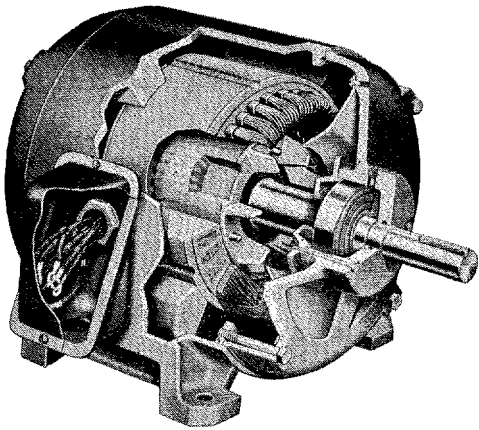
Sectional view of typical drip-proof, general-purpose, squirrel-cage induction motor.
